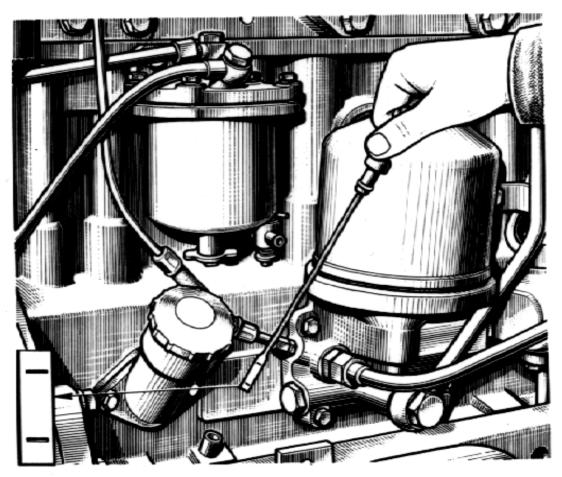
Checking the oil level in the diesel engine crankcase.
